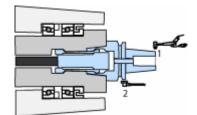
Tool/Tool-Holder assembly to spindle - cross transfer function measurement between the tip of the holder shank and the tool holder flange (TF 12)
